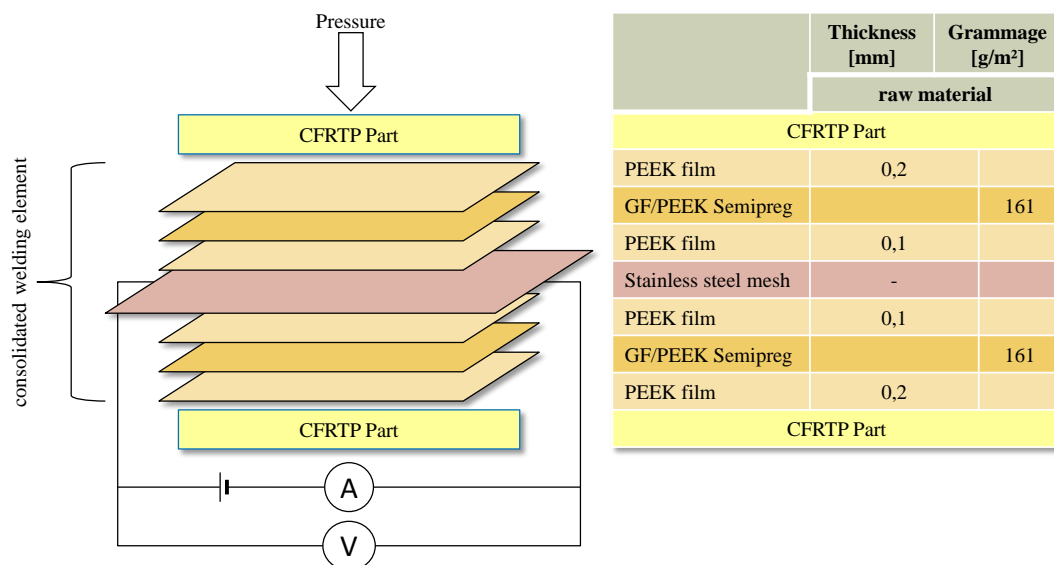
Schematic stacking sequence of the implant resistance welding element and welding setup
